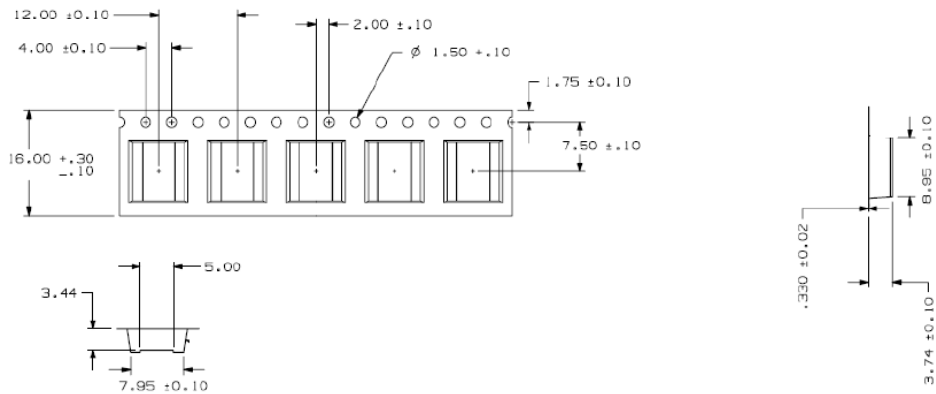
Packing tape dimensions for the 12 lead DFL Package. Dimensions in millimeters [mm].
